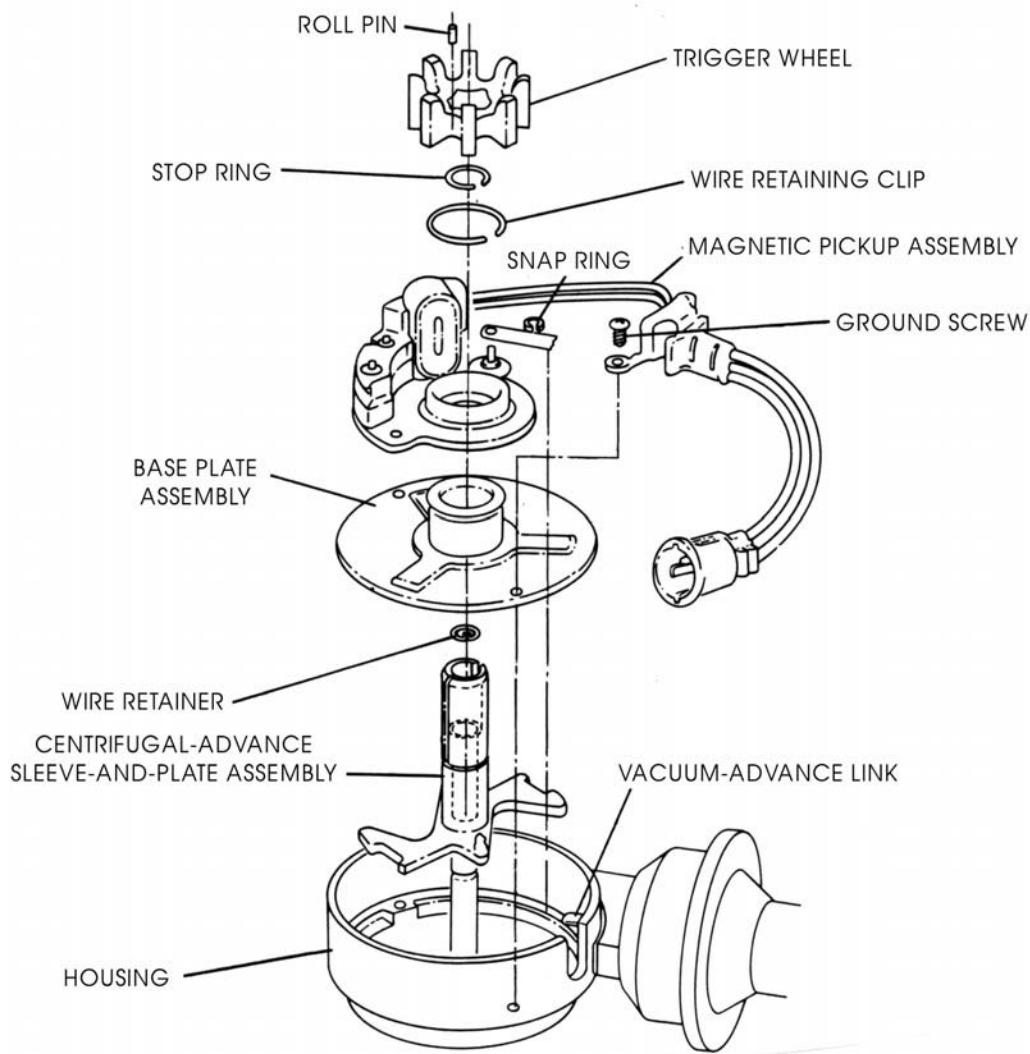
Shown here is an exploded view of an electronic-ignition distributor that has a single-pole pickup coil.
